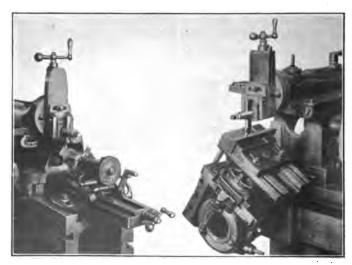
Using the shaper centers. Fig. 81.—Shows universal table.
